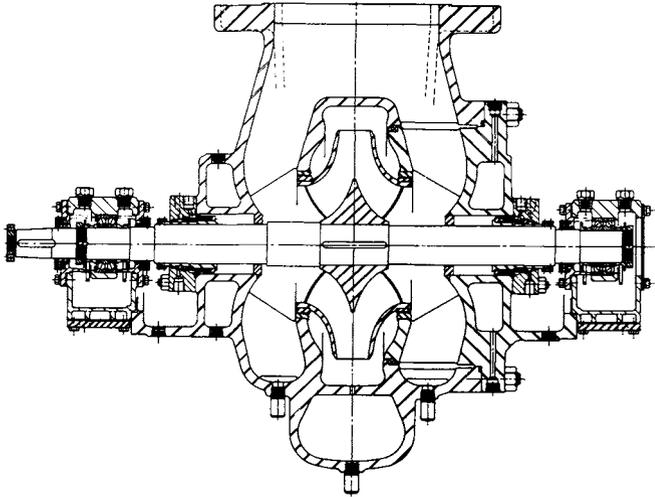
Single stage double flow between bearing (Courtesy of Union Pump Co)
